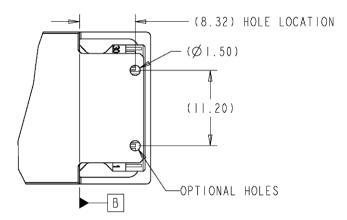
OSFP, back, bottom view, optional signal pad inspection holes
